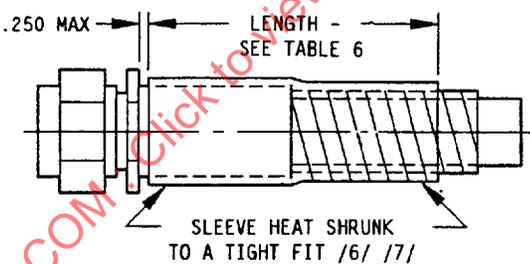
ABRASION SLEEVE ATTACHMENT
